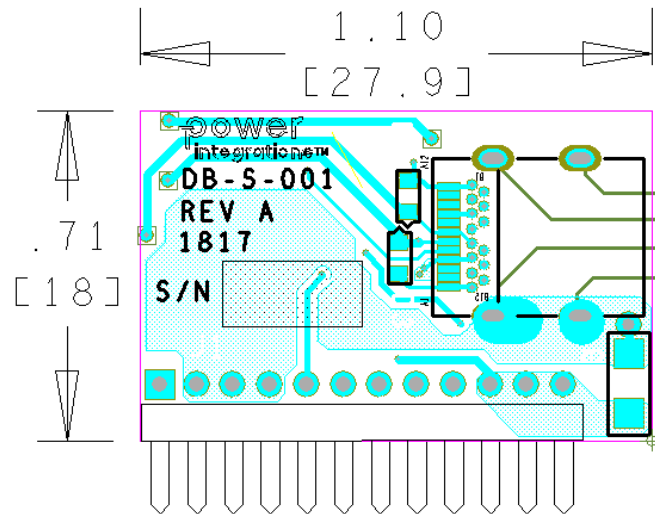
Printed Circuit Layout, Daughter board, Top.
